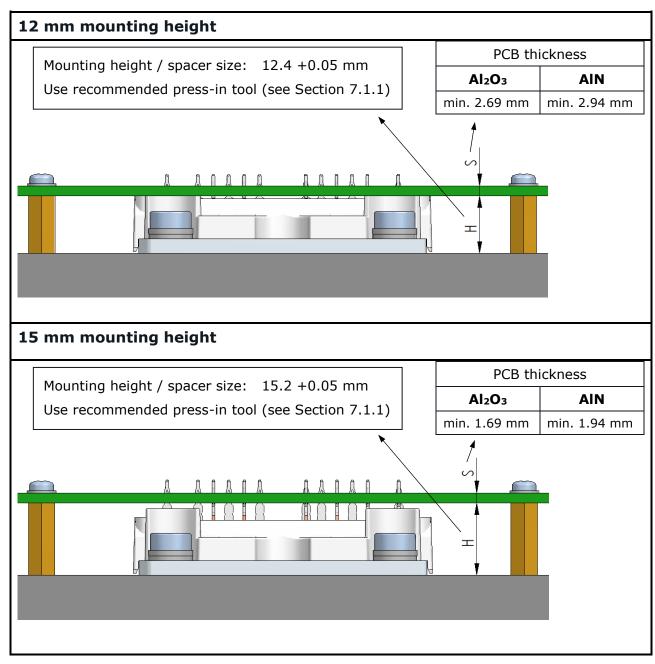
Mounting height and PCB thickness for Press-fit pin type module
